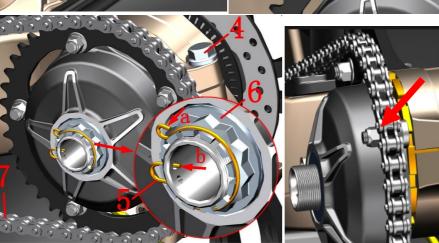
Rear wheel, swinging		Sprocket assembly 1	CHK
